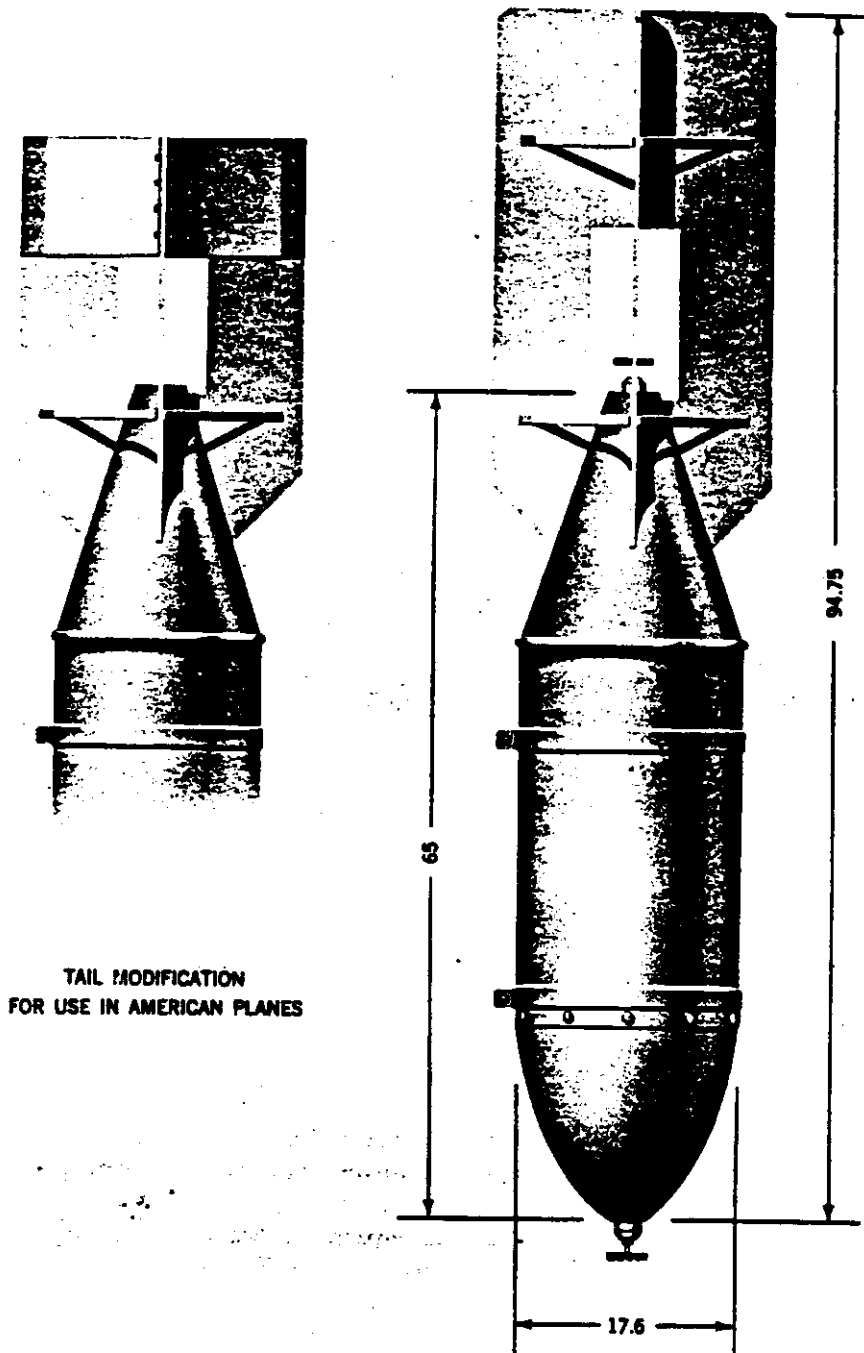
FAB-500 (WELDED) GENERAL PURPOSE BOMB.
